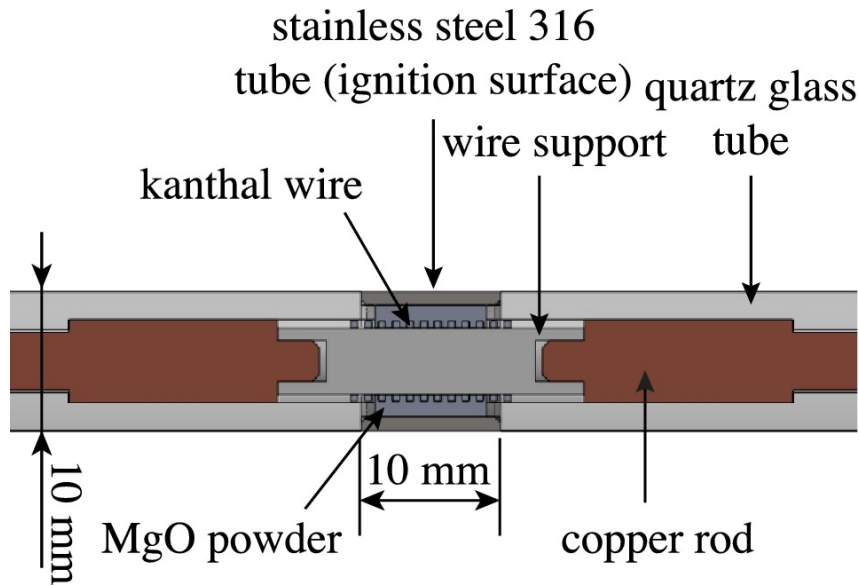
CAD cross-section view of the parts of the cylinder assembly, from Boeck [40]. Used with permission.
